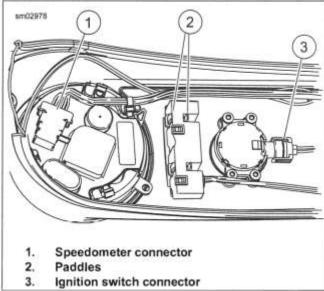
Release Paddles to Free Indicator Lamp Assembly: Road King
